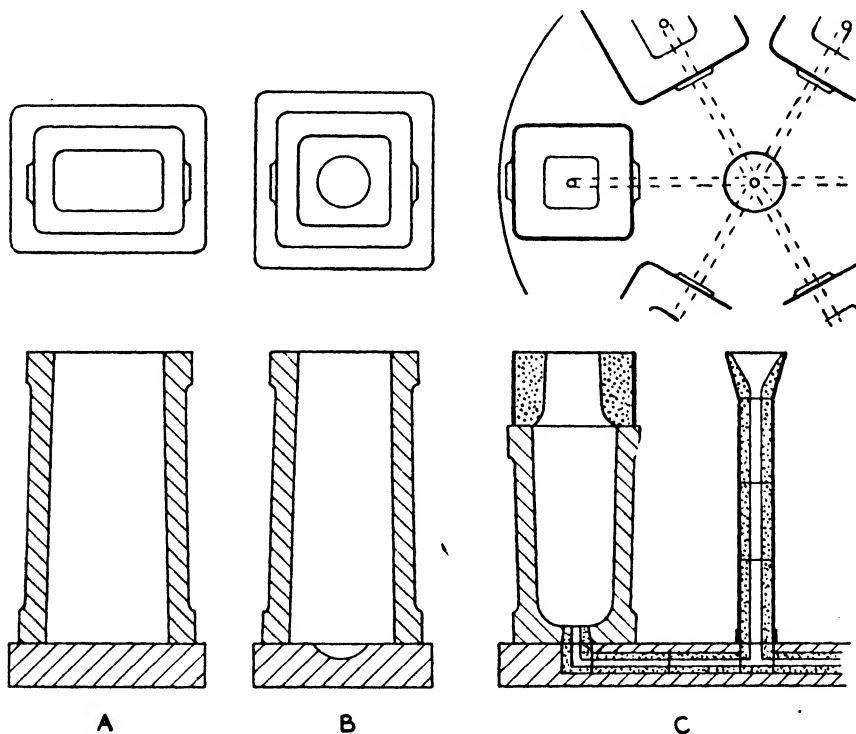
Plan and sectional elevation illustrating ingot moulds for steel.
